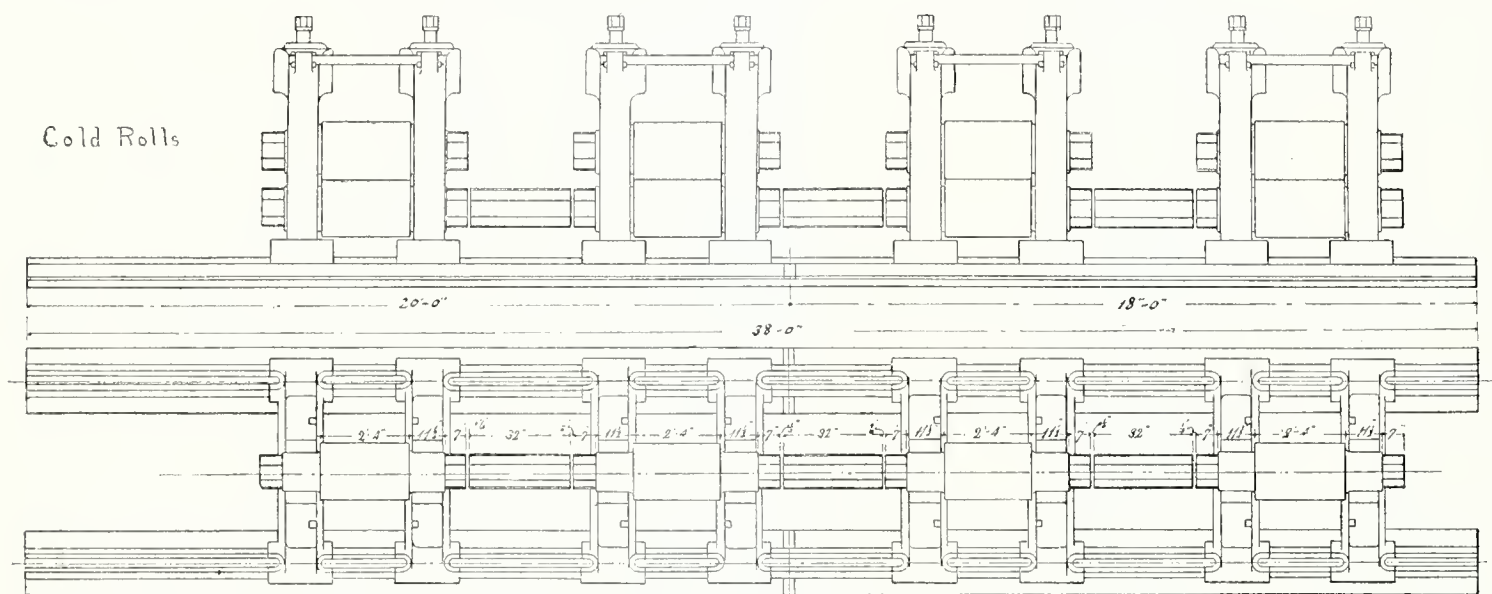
An American Tin Plate Mill. Elevation and Plan.
